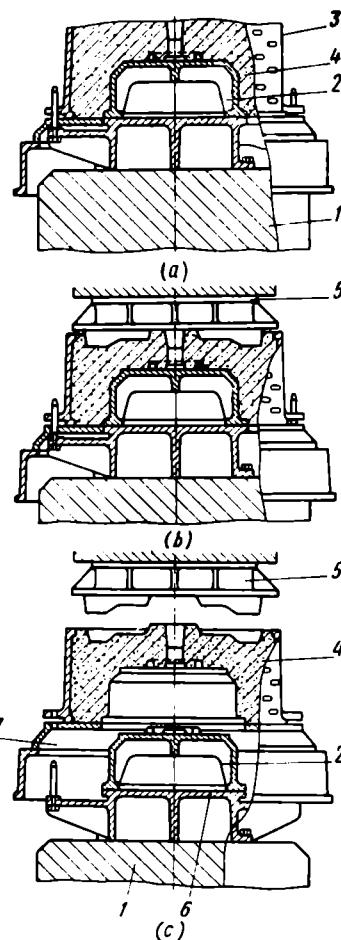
Stages of manufacture of a mold cope on a jolt pattern-draw molding machine
